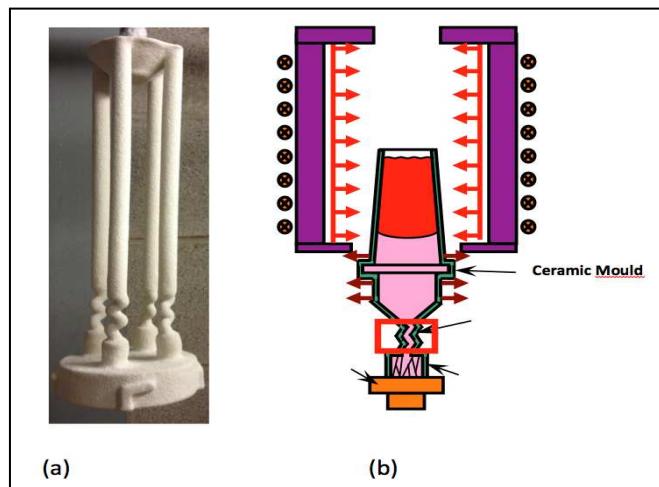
(a). Assembly mold with ceramic coating; (b). Schematics of Investment Casting Furnace for Single Crystal Castings [13]
